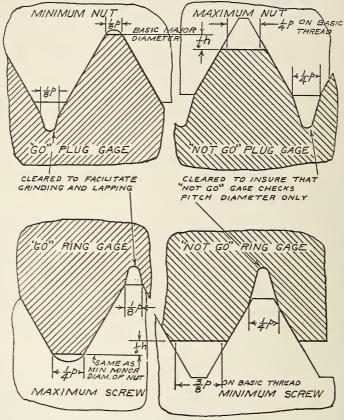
Thread form of "go" and "not go" thread plug and ring gages.
